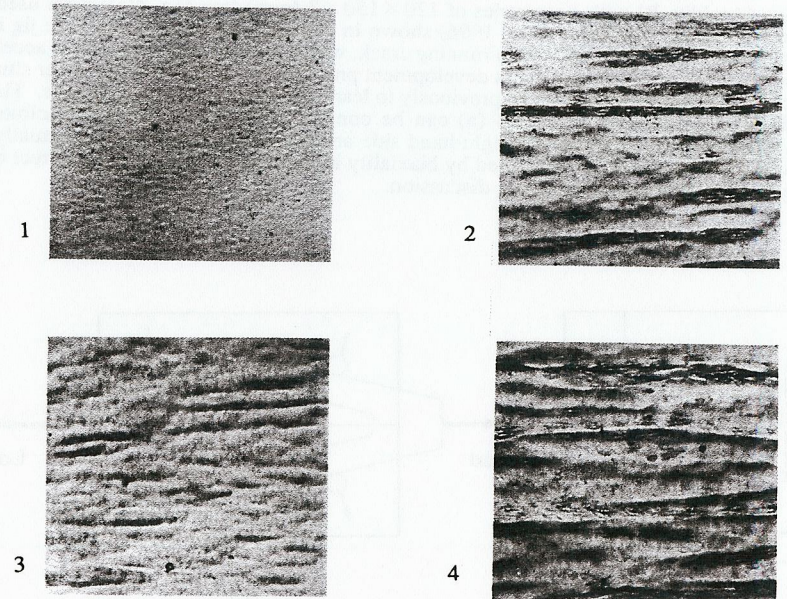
Fracture surface appearance at places 1-4 indicated in Fig. 6 by the corresponding numbers. Actual sizes of each photograph are 1mm by 1mm.
